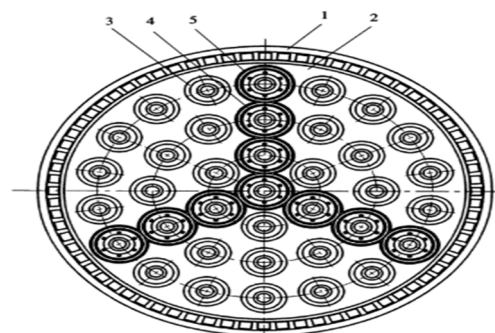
Injector layout of the per burner. (1)—Housing of the gas generator; (2)—Fire bottom; (3)—Gas liquid nozzle; (4)—Gas liquid nozzle; (5)—Radial partitions. Reproduced from RU Patent No. 2806937C1 in Ref. [194].
